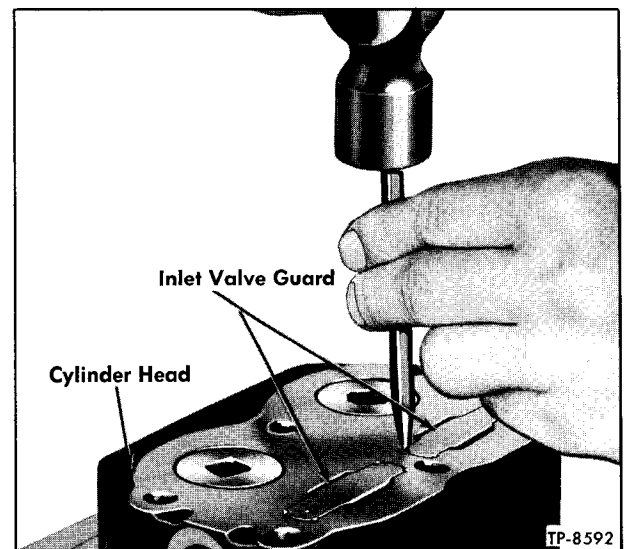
Staking Inlet Valve Guard in Cylinder Head
